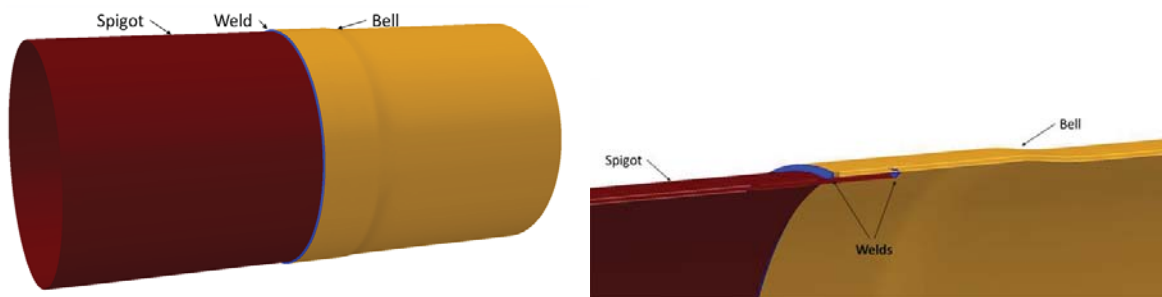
Finite element model of a welded lap joint; geometry of the double-welded area of the joint.
